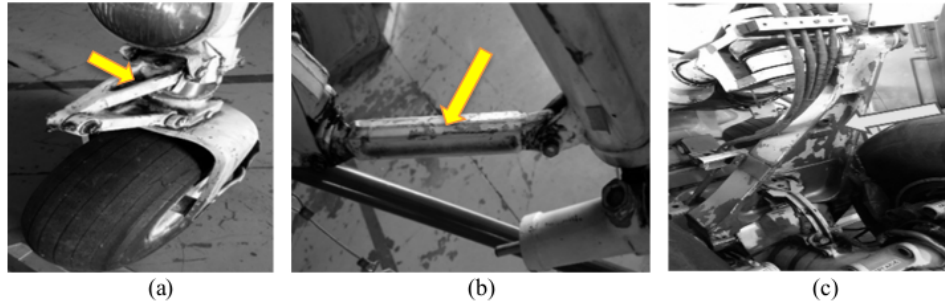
Arrows show pocket milling application in manufacturing landing gears for private jet Cesna 206 ((a) and (b)) and Boeing 747 (c)
